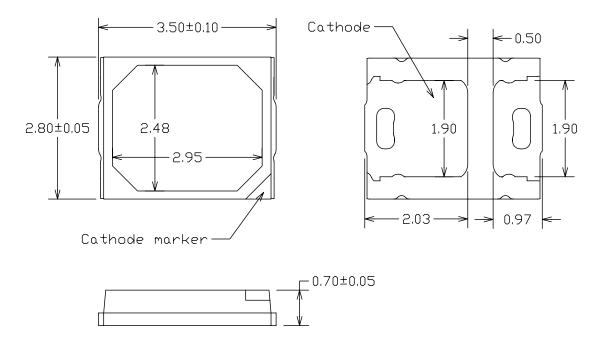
Mechanical dimensions for LUXEON 2835 Line.
